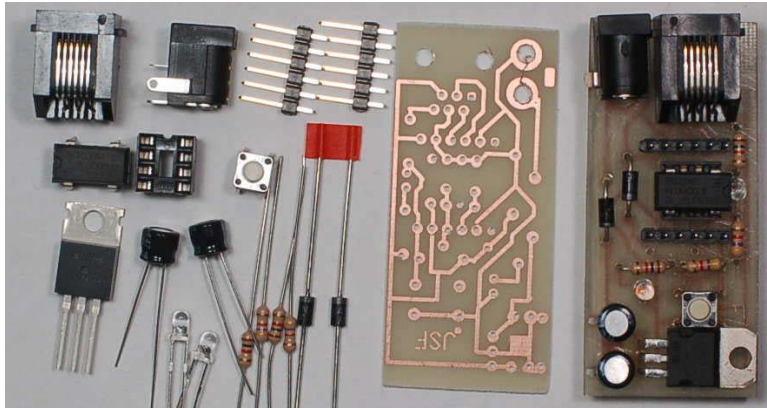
Kit for Adaptor Assembly showing all components and finished assembly.
